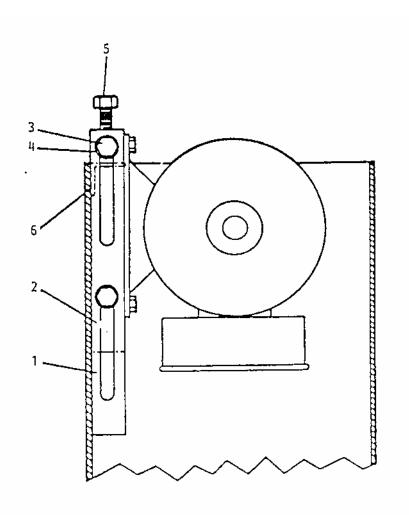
MOTOR MOUNTING BRACKET ASSEMBLY
